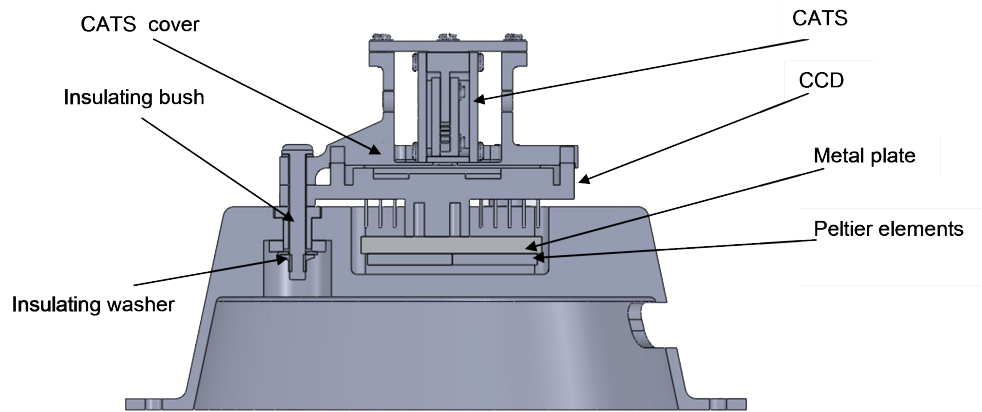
Cross-section of CATS assembly; CATS+CCD on the ‘flowerpot’ bracket [81].
